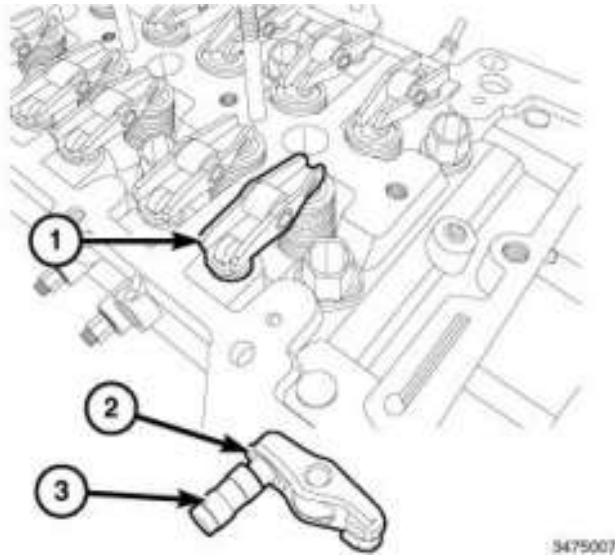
Rocker Arm, Retaining Clip & Lifter
